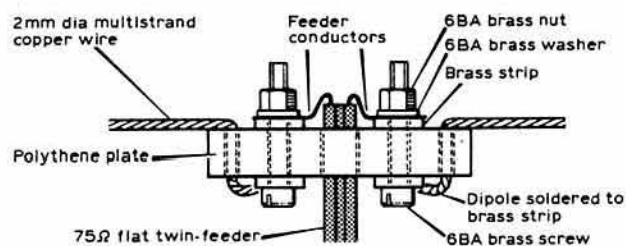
Exploded end-view of centre plate showing mechanical constructional details
